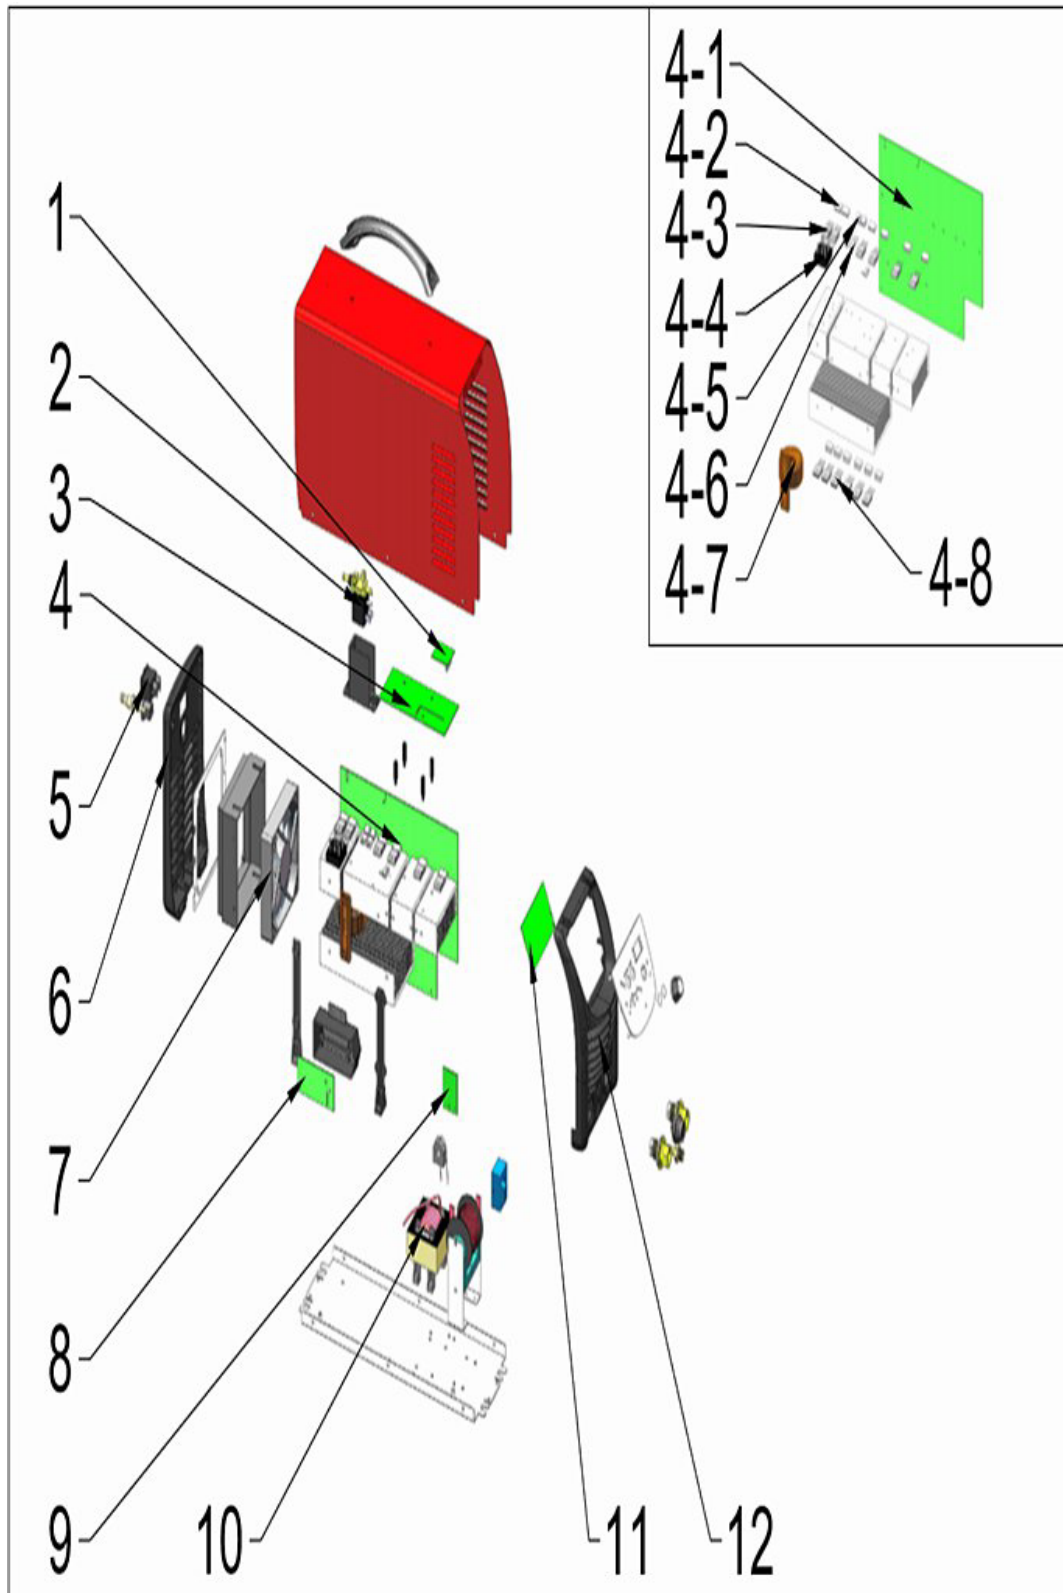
Spare parts drawing CRAFT-TIG 201 DC P PULSE
